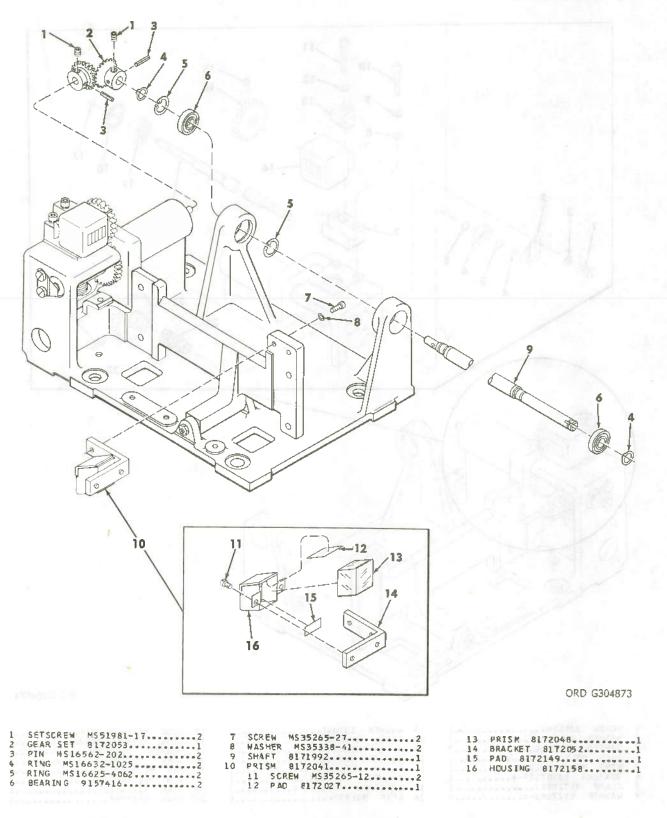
LEVEL, PRECISION, MASTER SUBASSEMBLY /8172012/-PARTIAL EXPLODED VIEW
